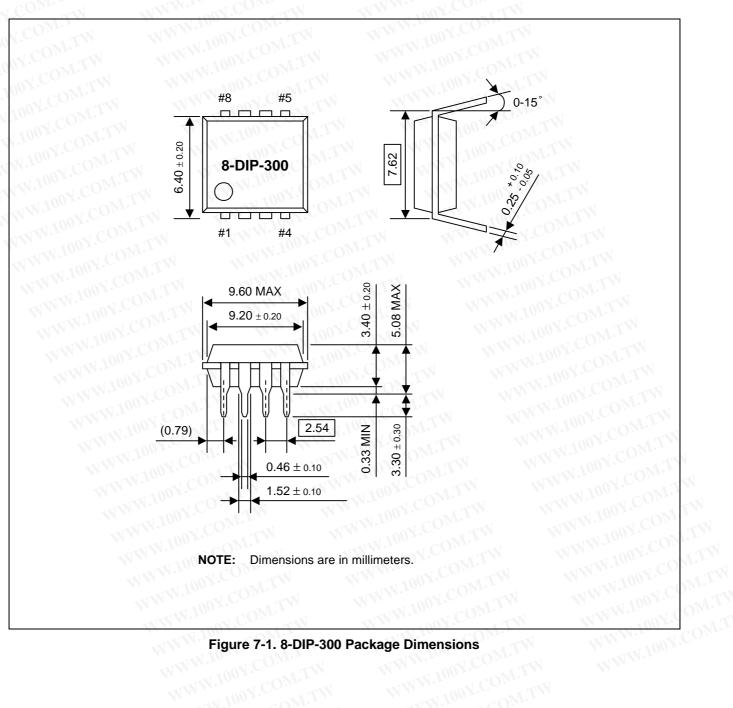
8-DIP-300 Package Dimensions WWW.100Y.CO.
